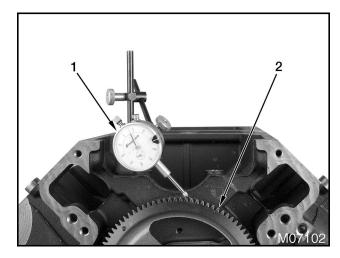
Camshaft assembly gear backlash check (camshaft gear to crankshaft gear)
